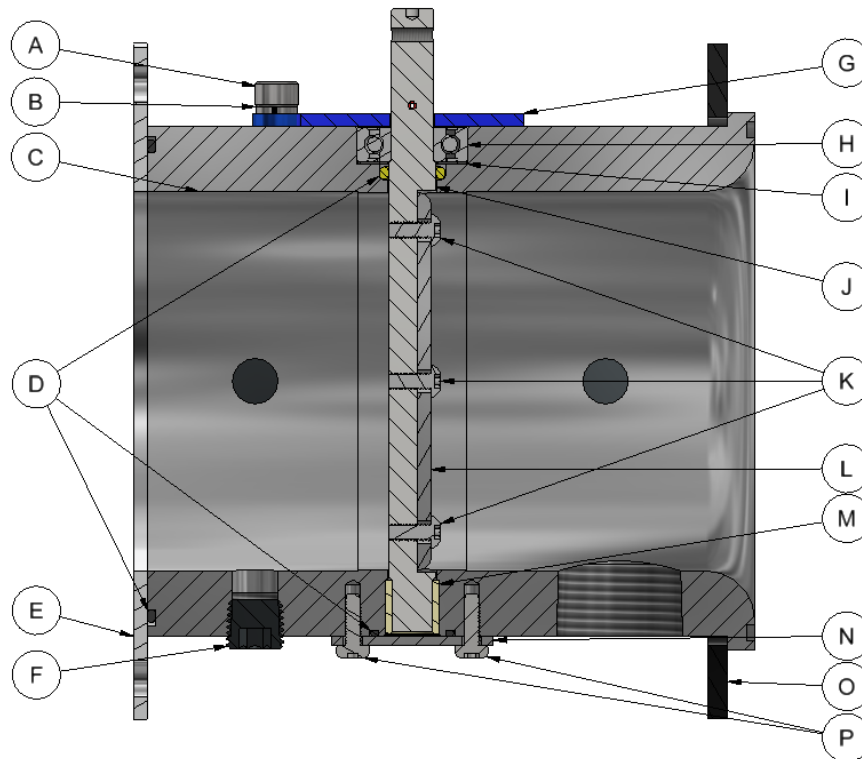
Cross-section of a PBA10.089A-Uxxxxxx
